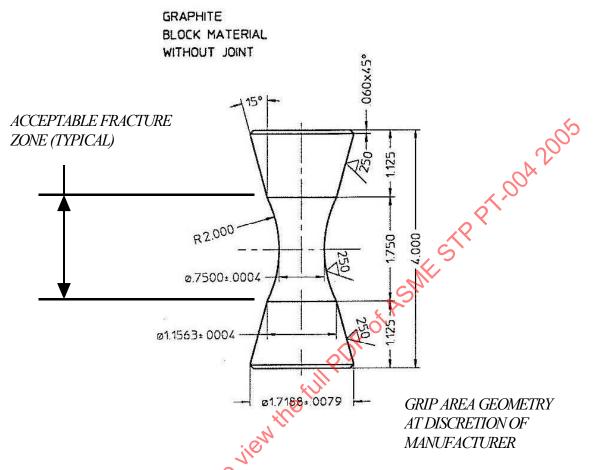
Tensile Test Specimen (from SGL Drawing SK4322-01)
